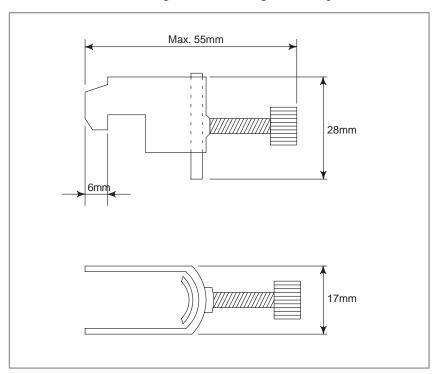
(e) Outer drawings of metal fittings for clamp
